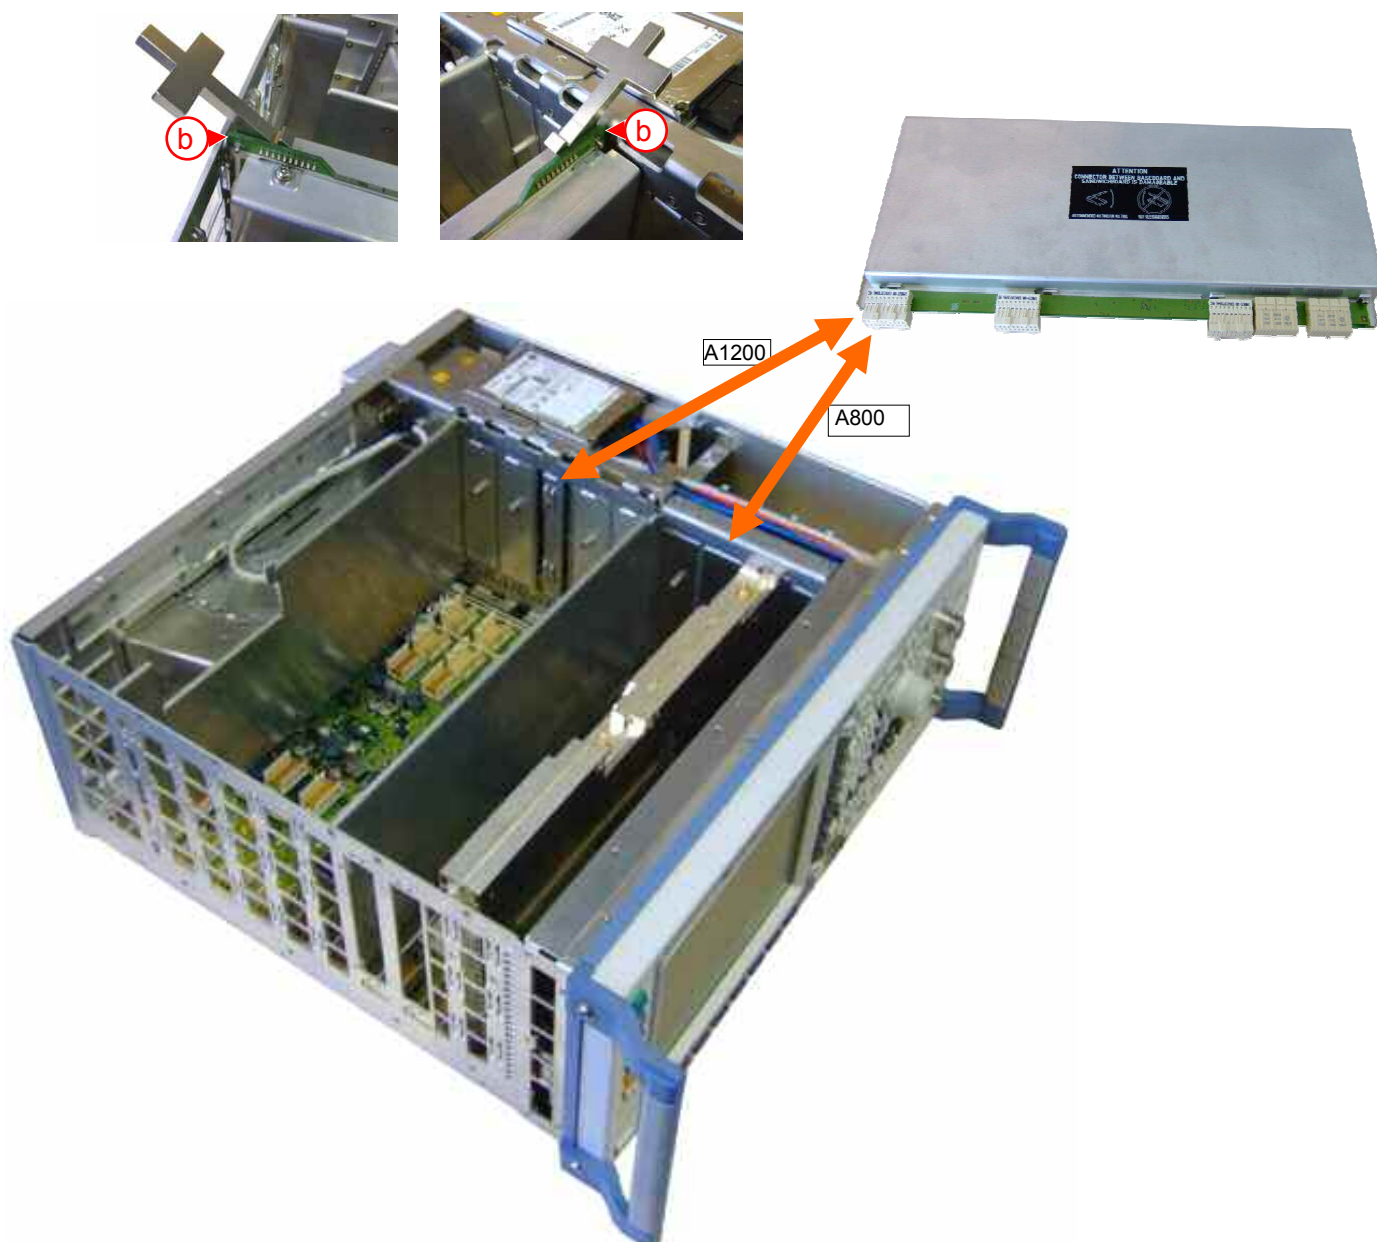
Removing the BB MEASUREMENT MODULE H100X
